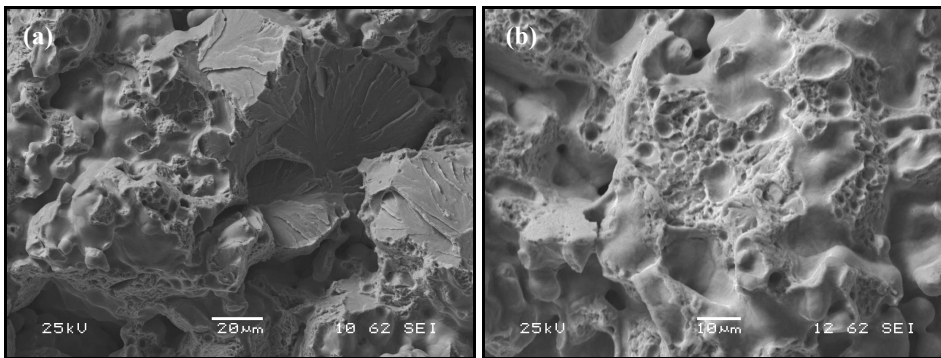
Fracture surfaces. (a) DC BHT, x700; (b) DC AHT, x1200.
